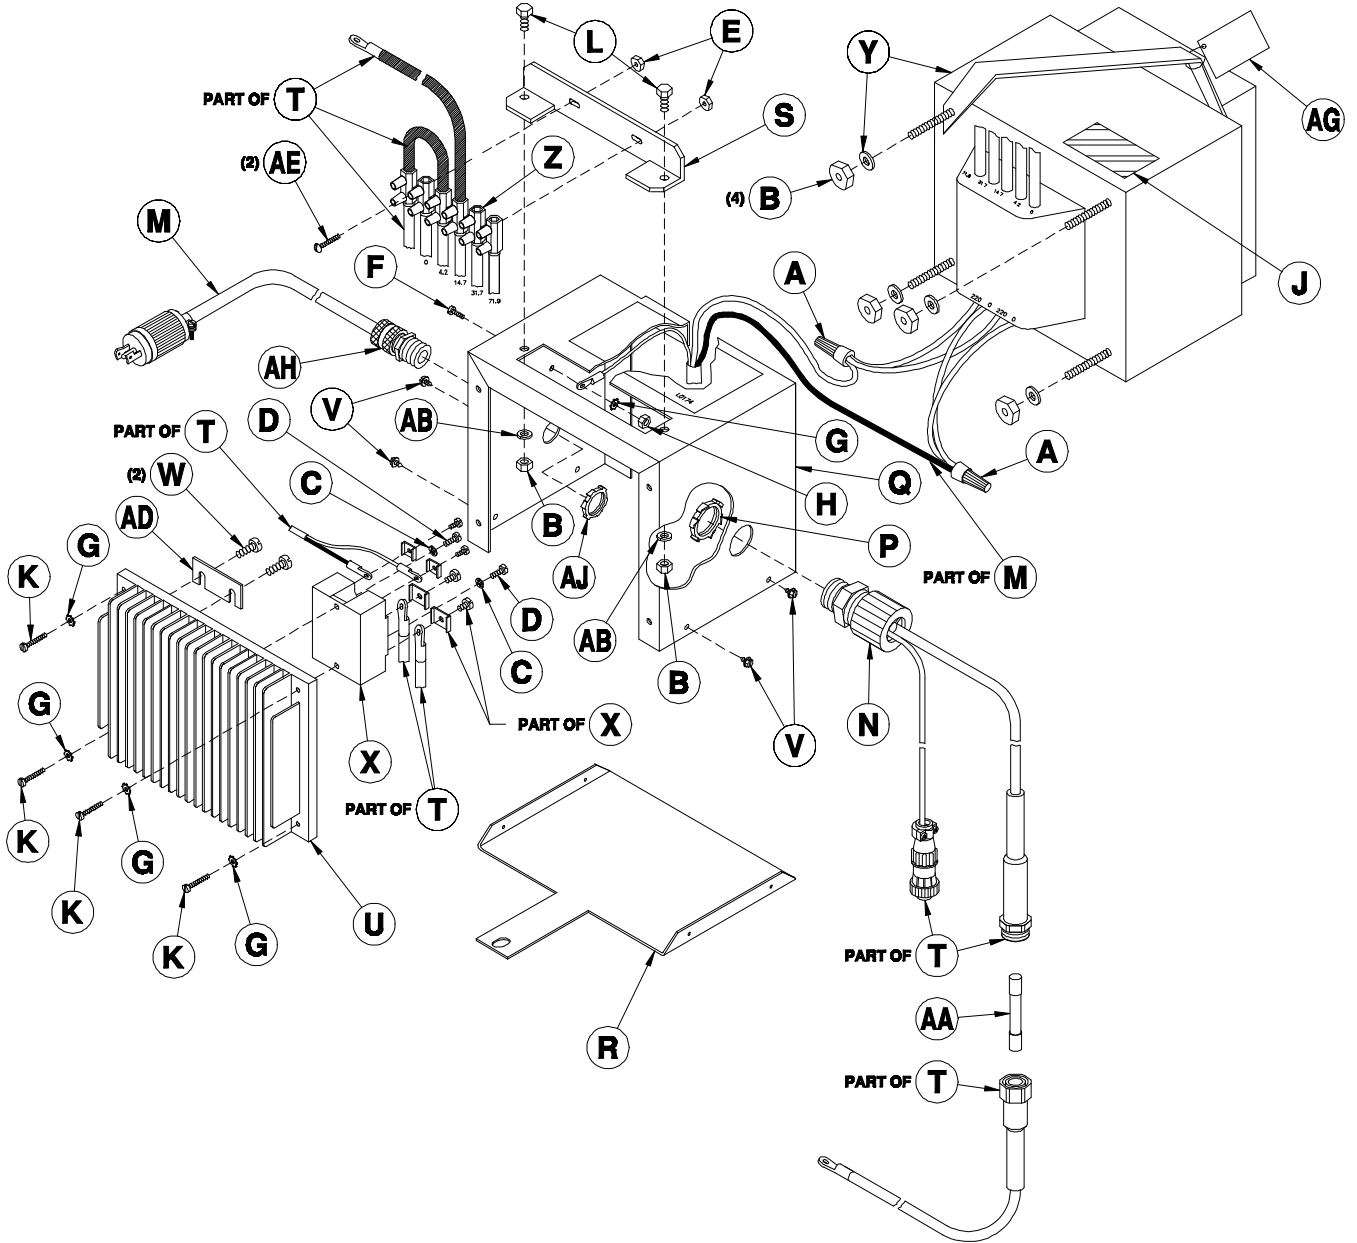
Automatic Hose Heat (Part No. 1277) Exploded View
